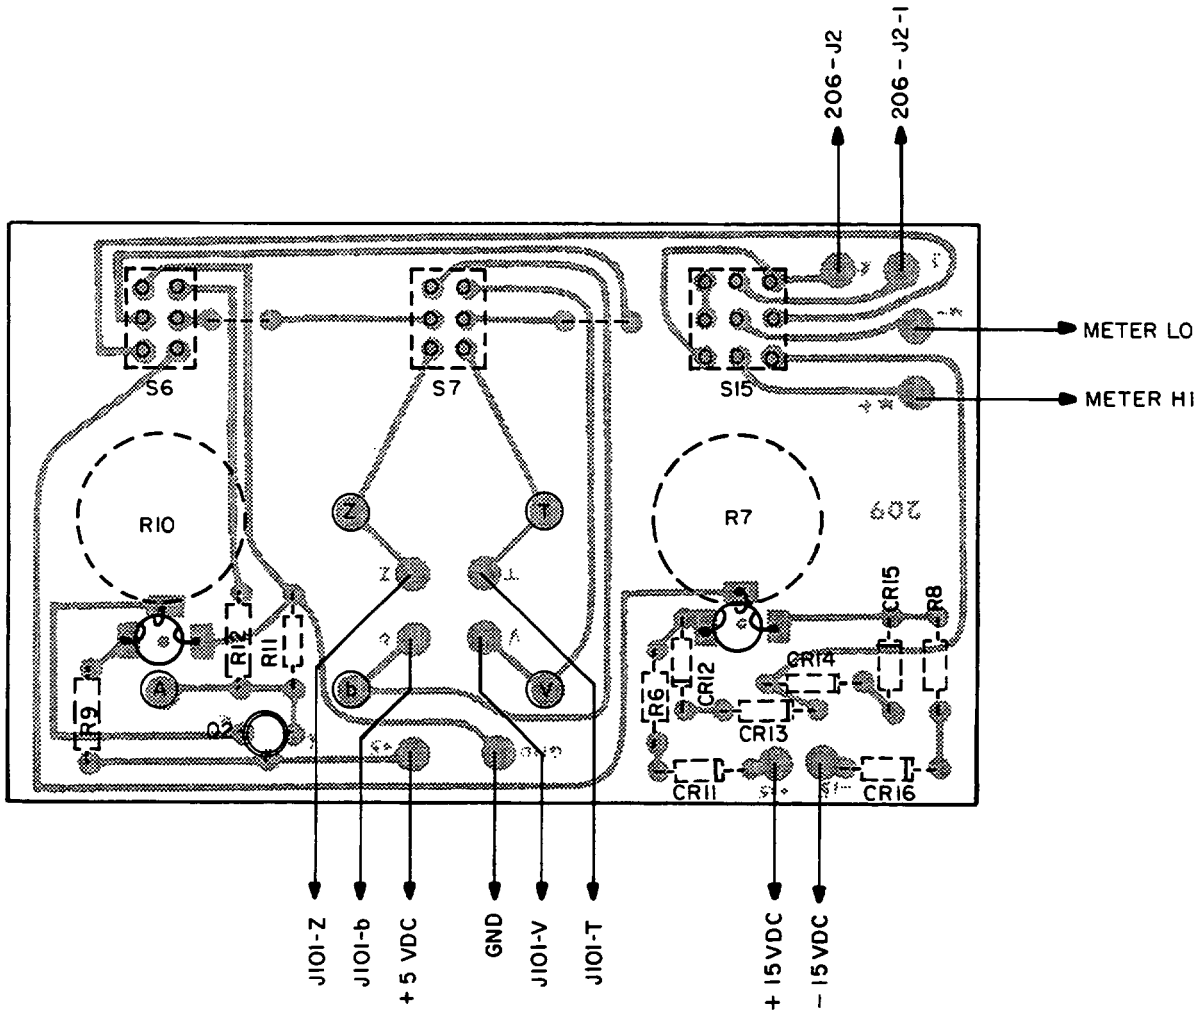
P.C. BOARD ASSEMBLY, BOARD 209, DRAWING
